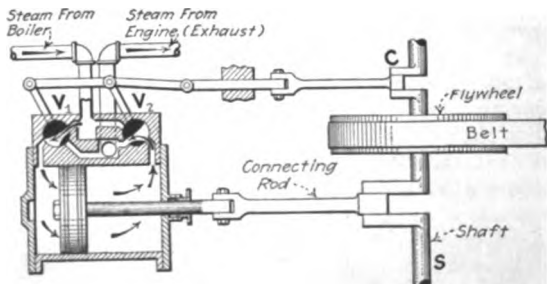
Section through cylinder of engine with automatic valves. (This shows how the valves of the engine of Fig. 4 can be automatically operated from the shaft.)
